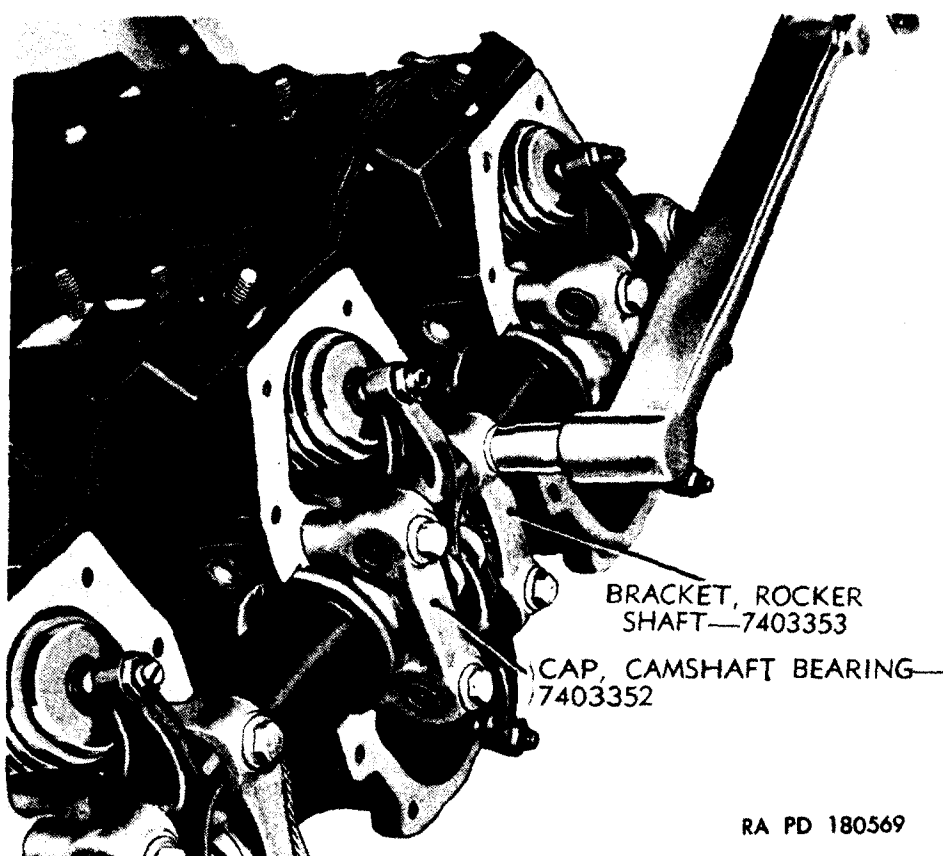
Adjusting intake valve rocker clearance for engine timing.
